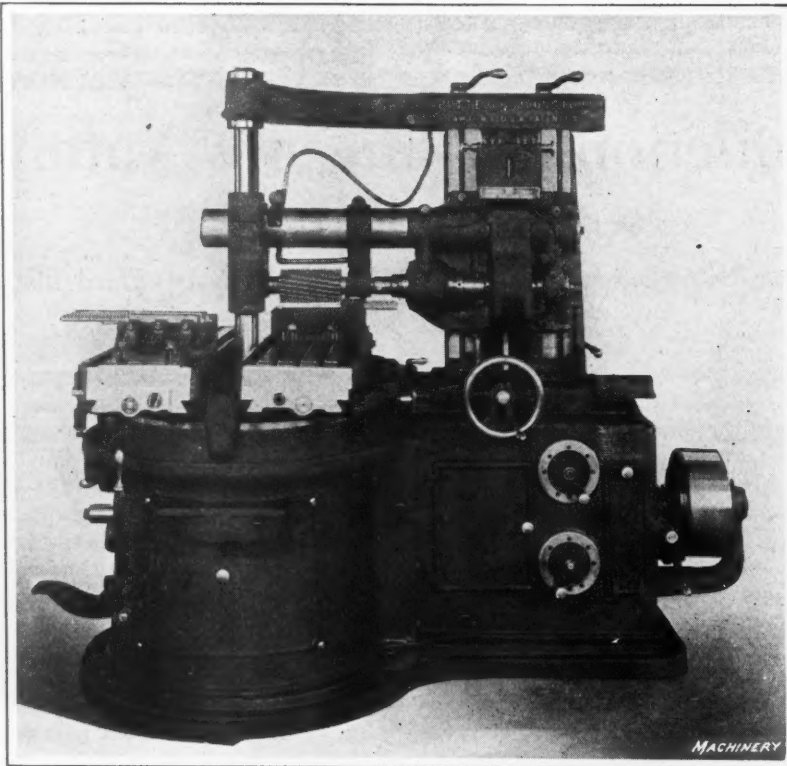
Automatic Indexing Type of Milling Machine built by the Potter & Johnston Machine Co.
